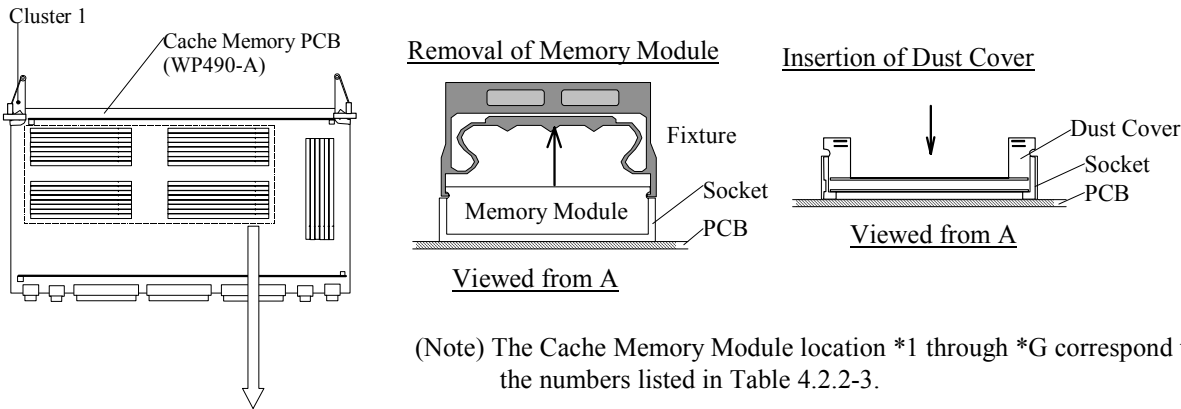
Removal of the Cache Memory PCB
